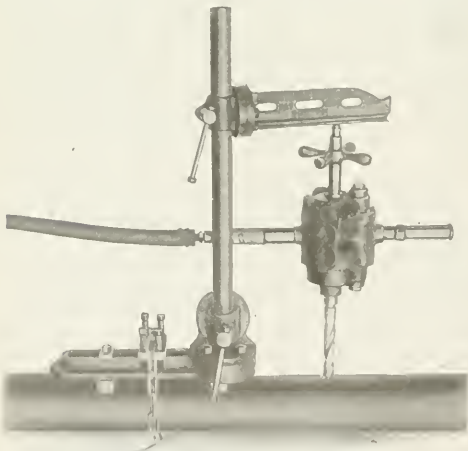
No. 2 Adjustable Drill Brace used with Pipe Drilling Attachment
